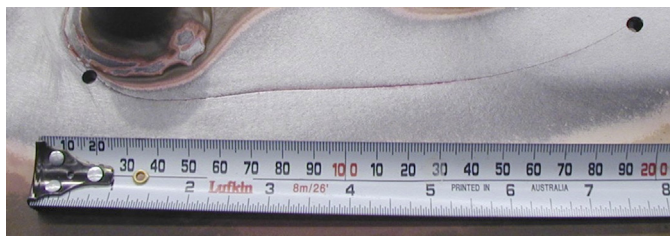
Structural crack in highhardness armour caused by delayed cracking. This crack is over 200 mm in length.
